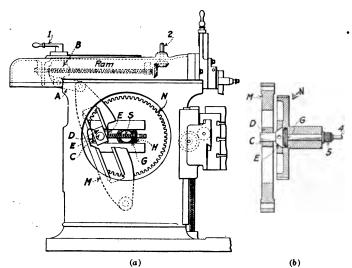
Shows driving mechanism from bull wheel N to ram, also mechanisms for adjusting length of stroke and position of stroke. In vertical section (b), gear H is not shown and in (a) a portion of the vibrating arm has been cut away.
